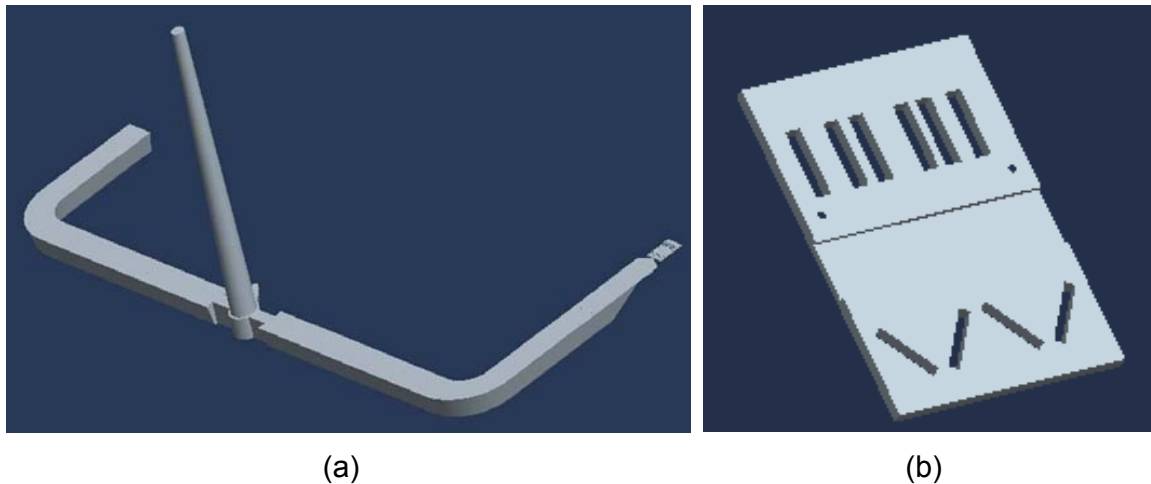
Complete moulded part including sprue, runner and micro component (a). Detailed view of the micro injection moulded part (b).
